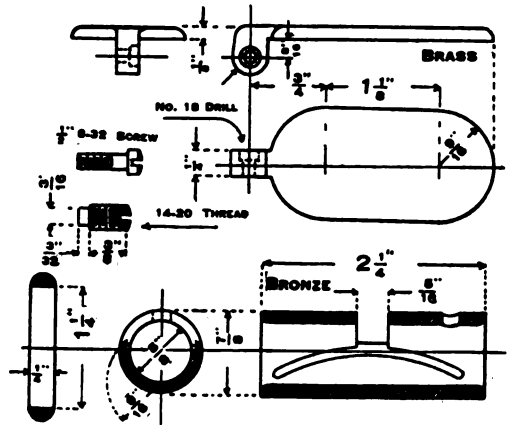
DETAILS OF THE MOTOR BEARINGS
